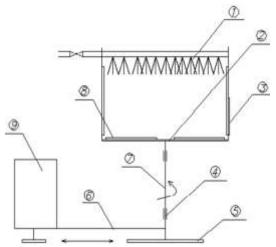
Principle of stomatch cleaning machine 1: sprinkler system; 2: washing dishes; 3: exit door; 4: support; 5: actuators; 6: Support plate; 7: machine shaft; 8: bar horizontal and vertical; 9: engine
